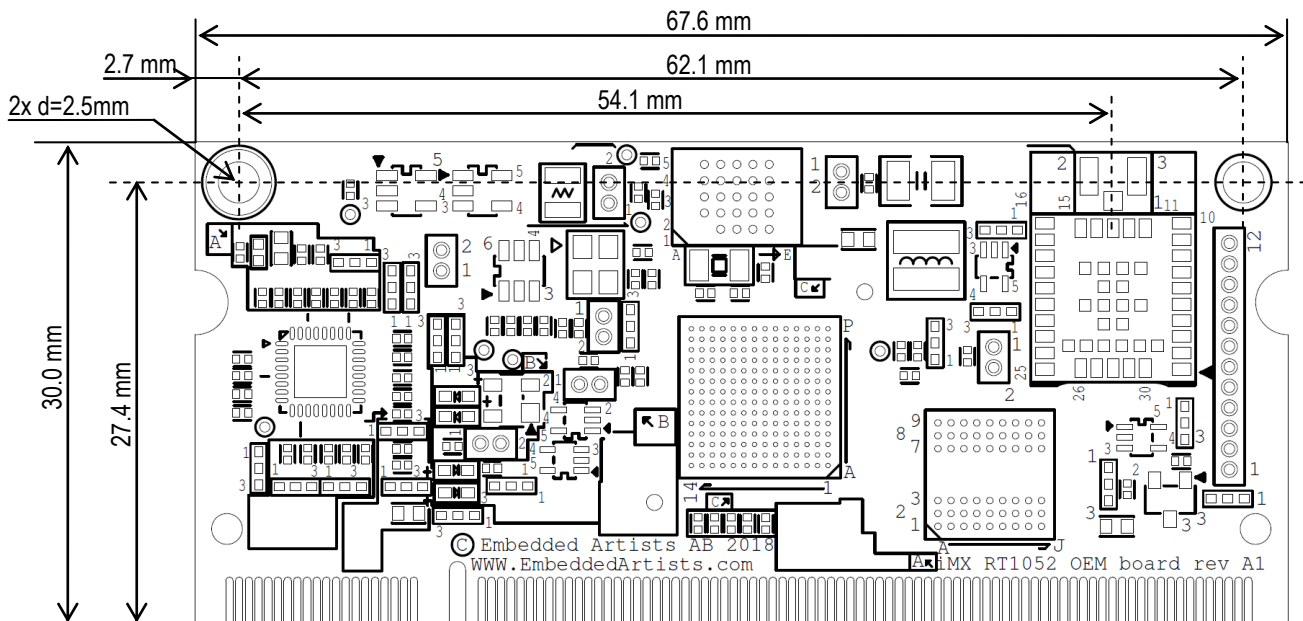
iMX RT1052/62 OEM Board Mechanical Outline
